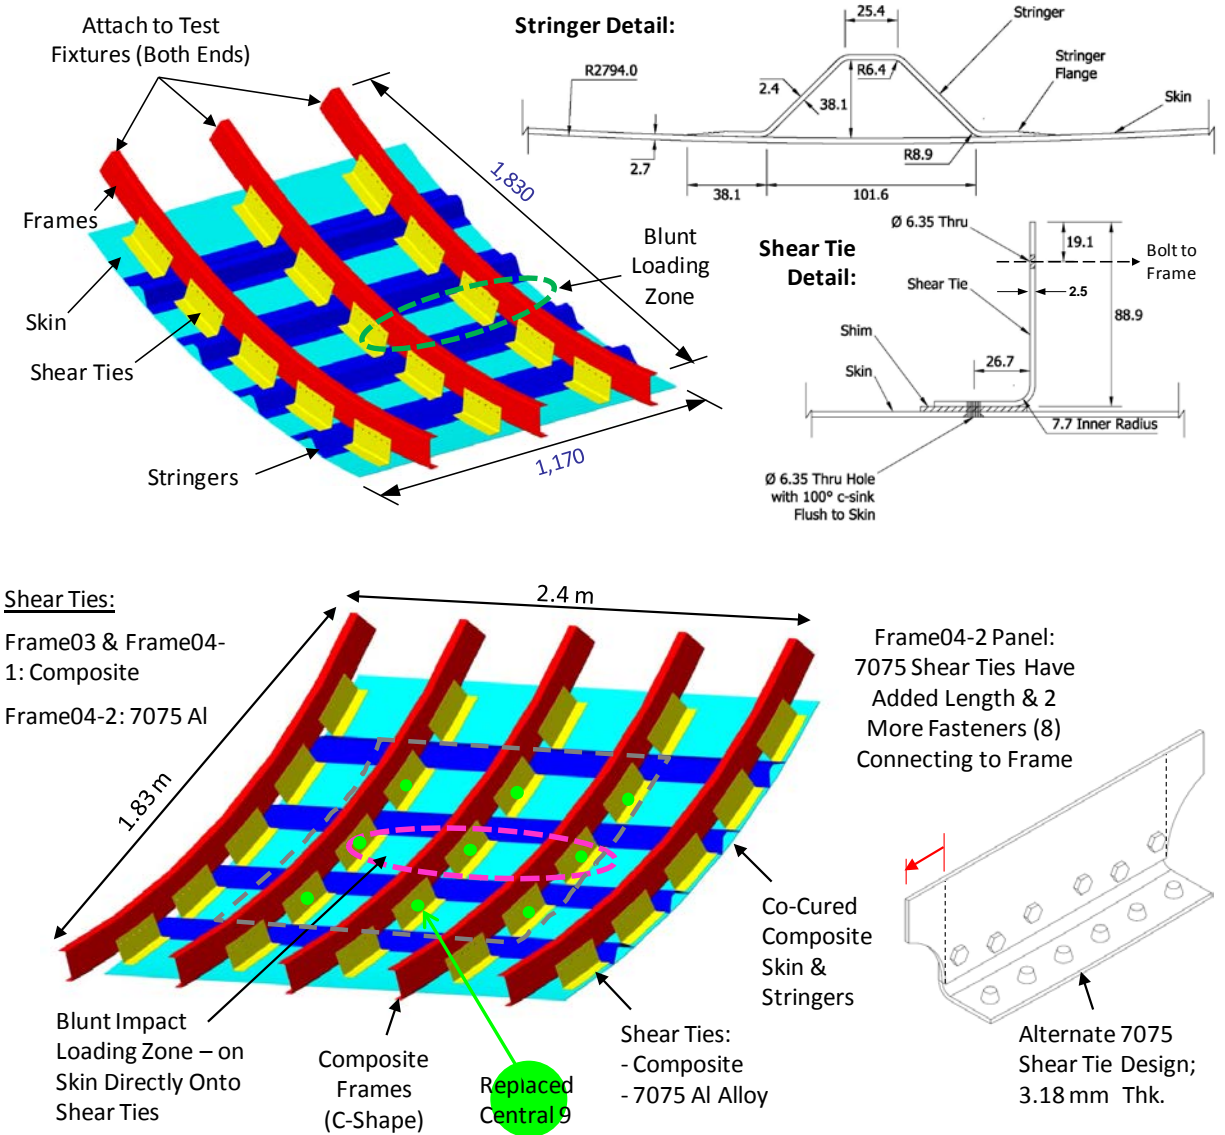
Frame focused test specimen (series ID: FrameXX); C-shaped frames have overall section dimensions 108 x 32 mm with 2.9 and 2.5 mm thick flanges and web, respectively. All dimensions are mm unless otherwise noted
